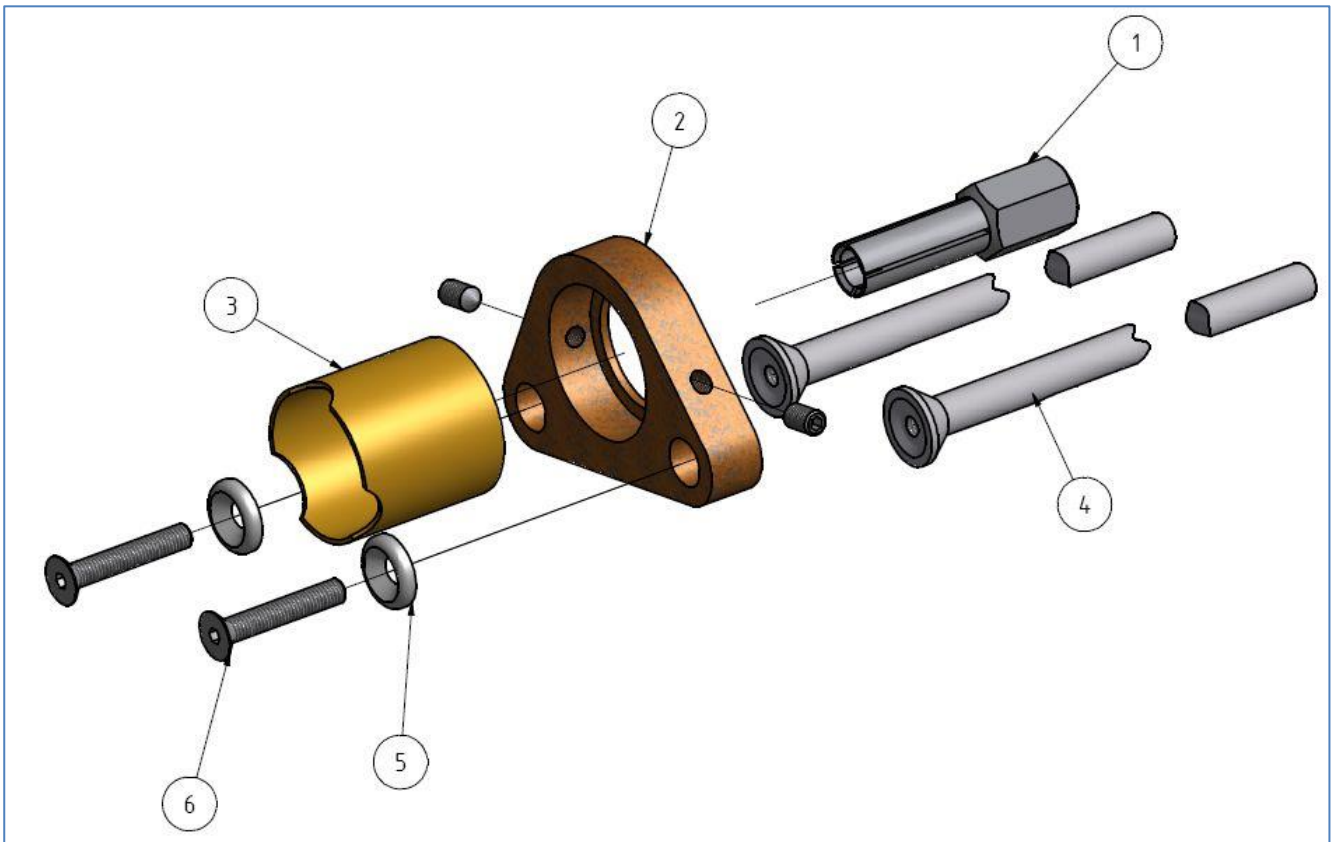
Gun accessories for short-cycle stud welding without shielding gas (gun SK 14)
